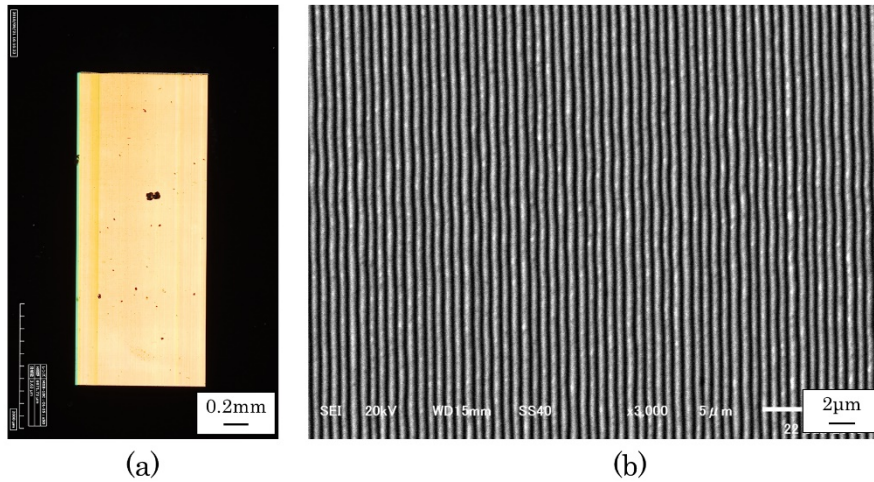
3 (a) Optical image of the mother mold fabricated by ultraprecision machining. (b) SEM image of the mother mold.
